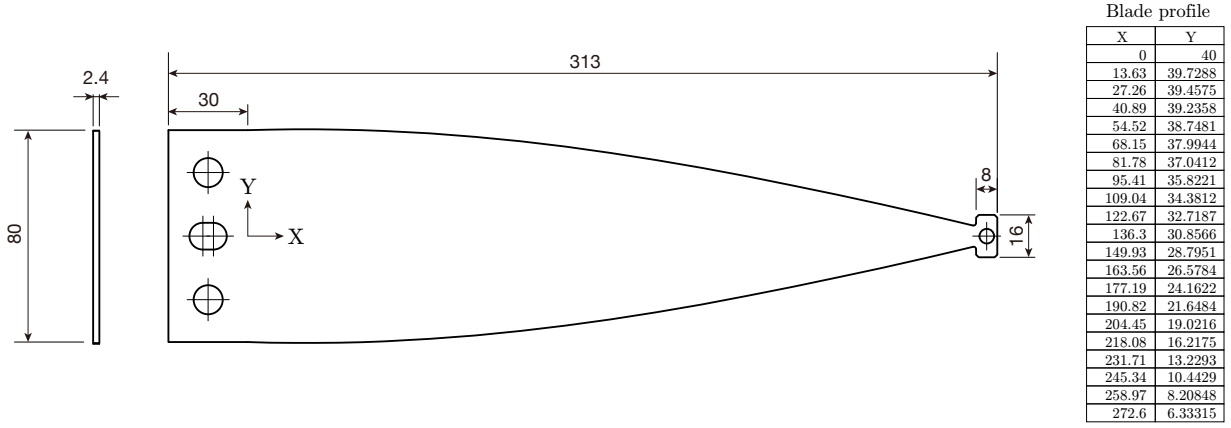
Dimension of a cantilever blade for the standard GAS filter in Type-A suspension.
